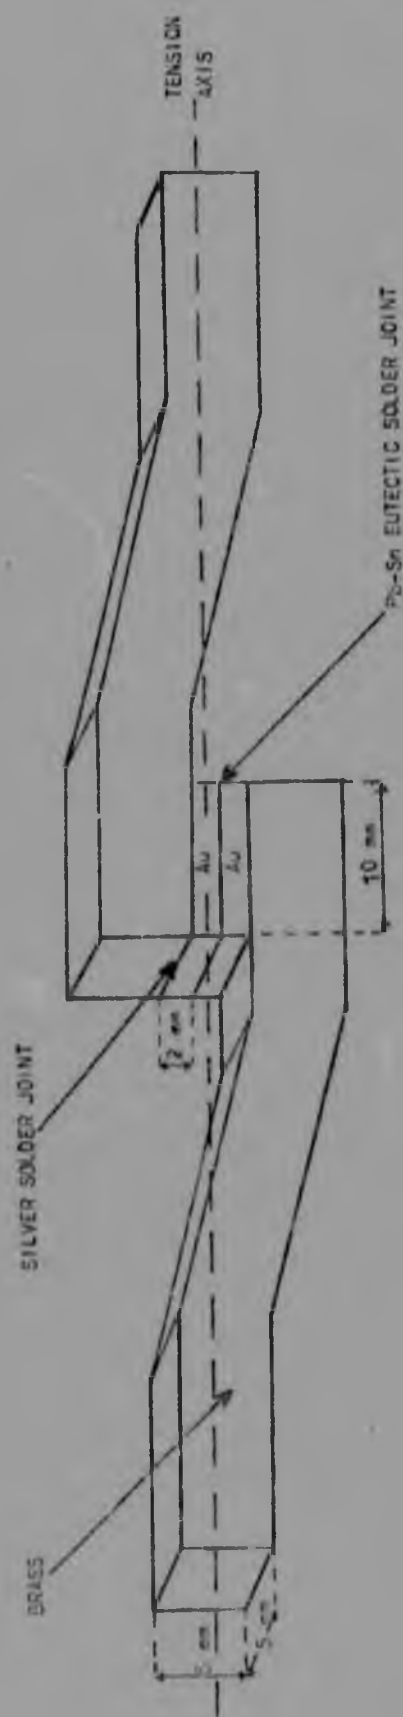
DIAGRAM OF LAP JOINT CONSTRUCTED FOR THE MEASUREMENT OF SHEAR STRENGTHS OF SOLDERED JOINTS BETWEEN PURE GOLD SURFACES.
